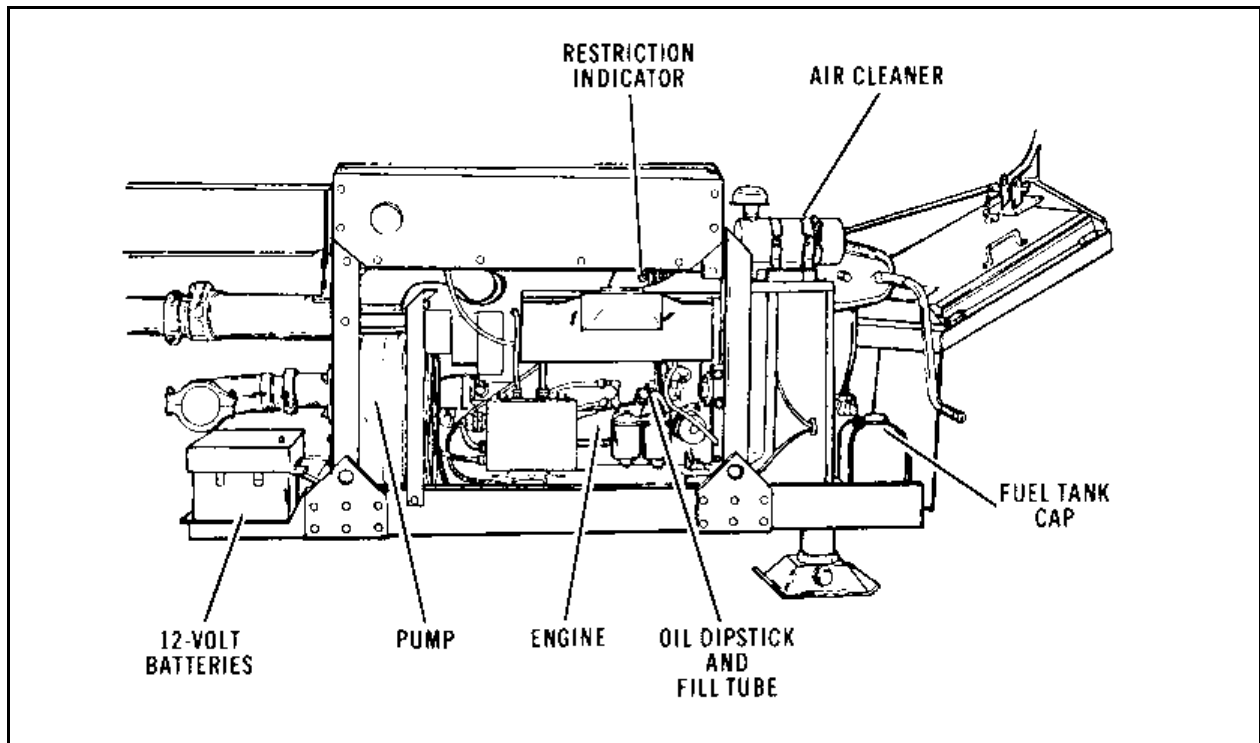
Pump and engine assembly of M969 tank semitrailer
